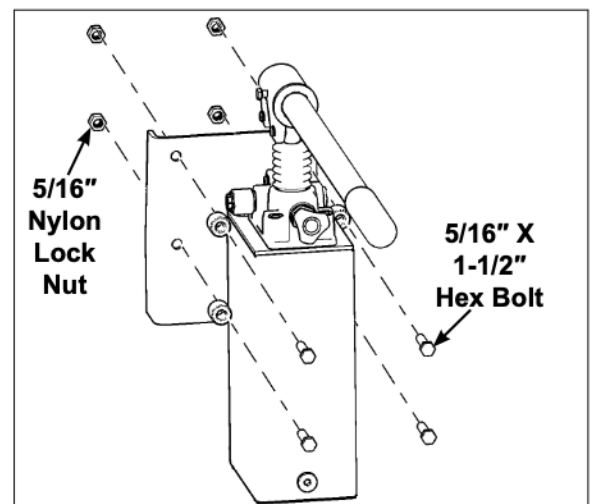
Remove hex bolts and nylon lock nuts to replace hydraulic hand pump.
